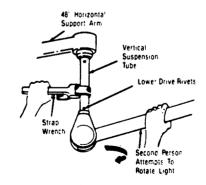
LOWER DRIVE RIVET INSPECTION.
